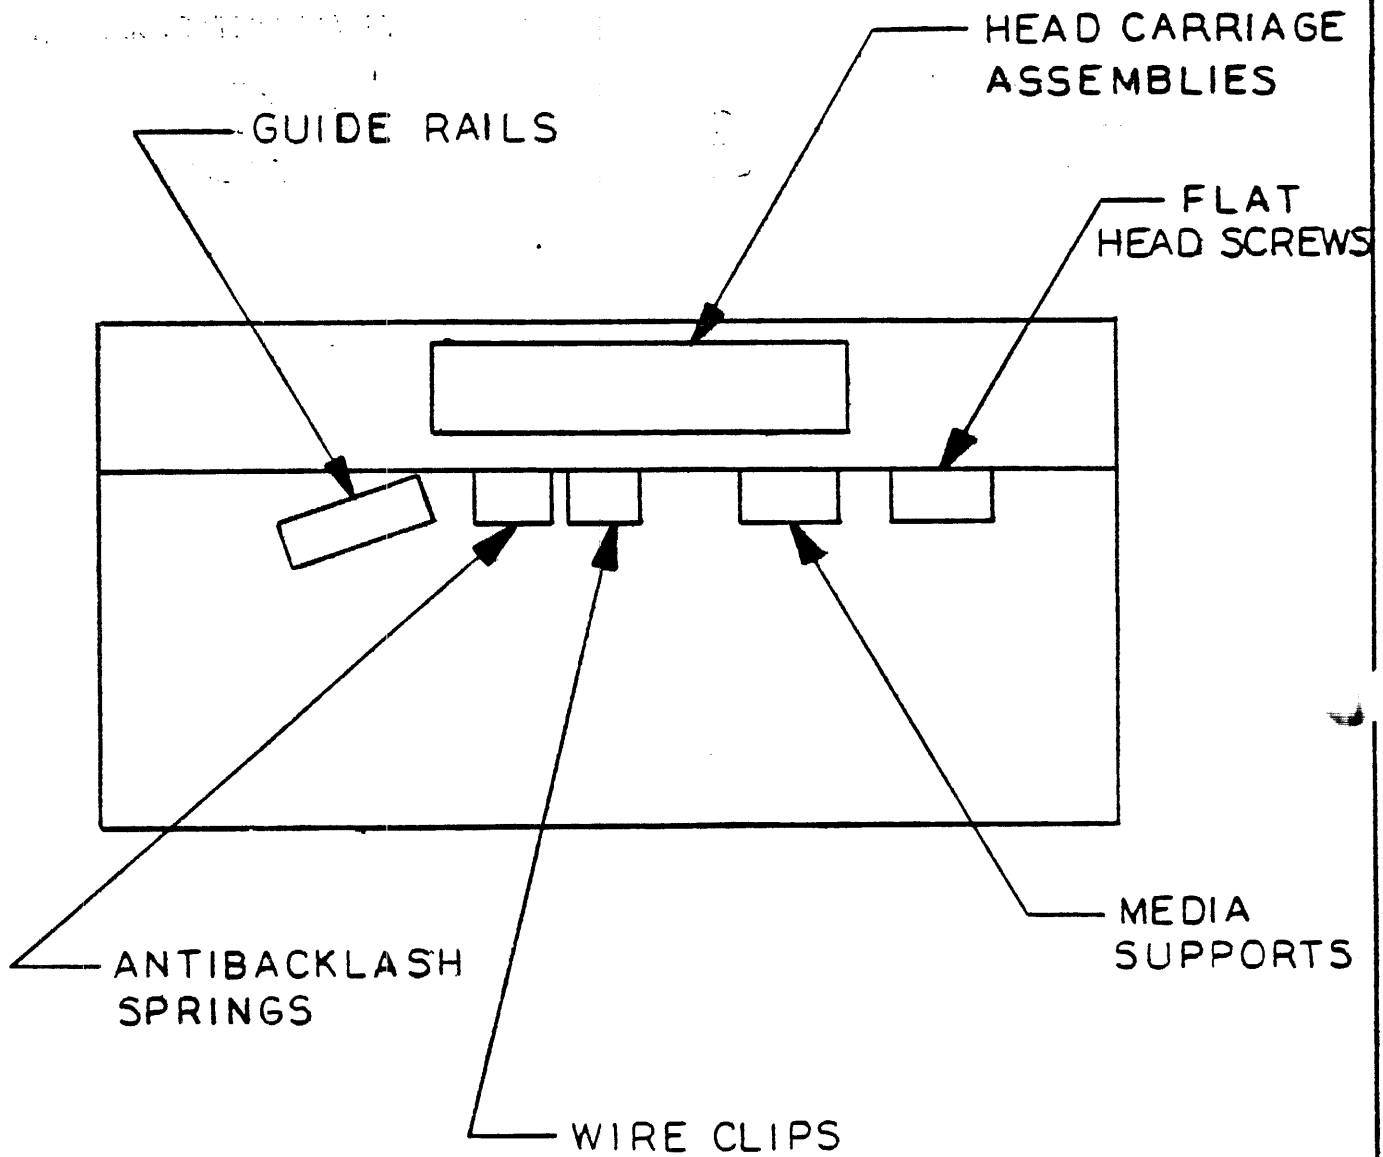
THE LAYOUT AT ASSEMBLY STATION #3A
